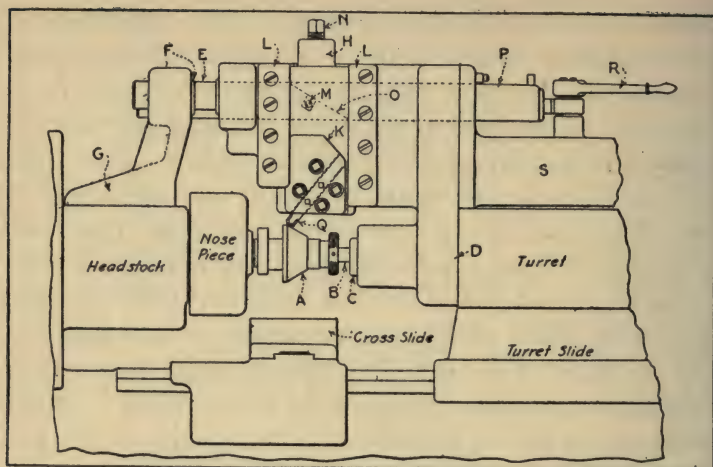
BEVEL GENERATING ATTACHMENT FOR A TURRET LATHE
